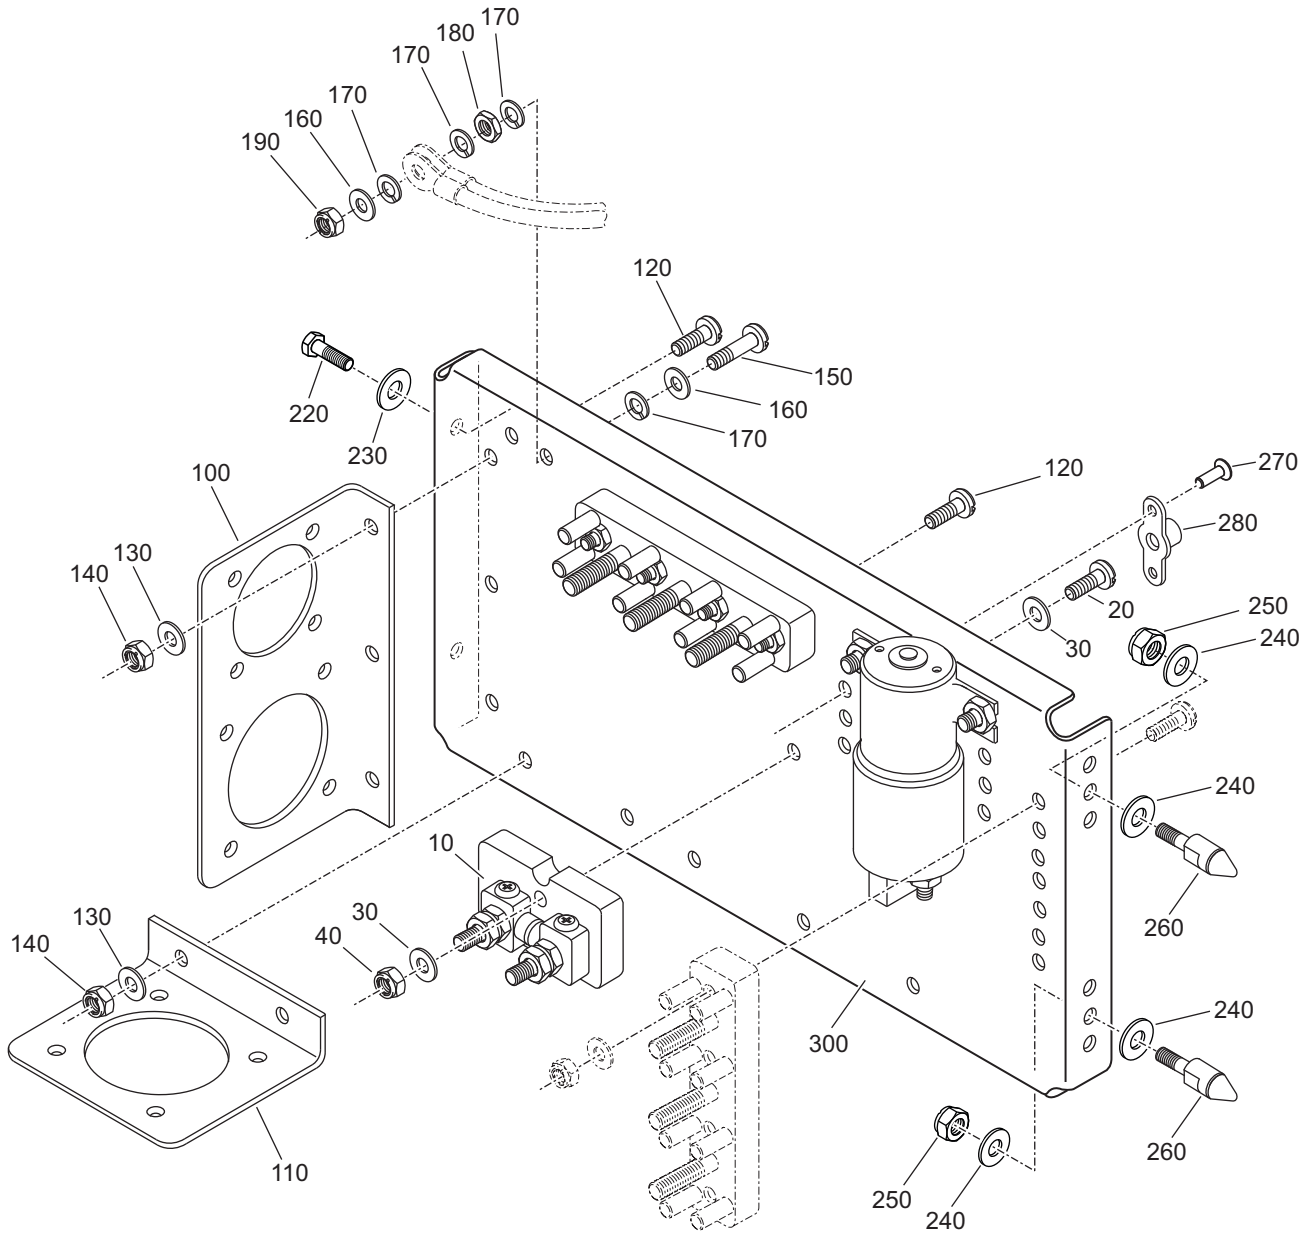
Relay Panel Plate Assembly (Sheet 2 of 2) - RH Shown
